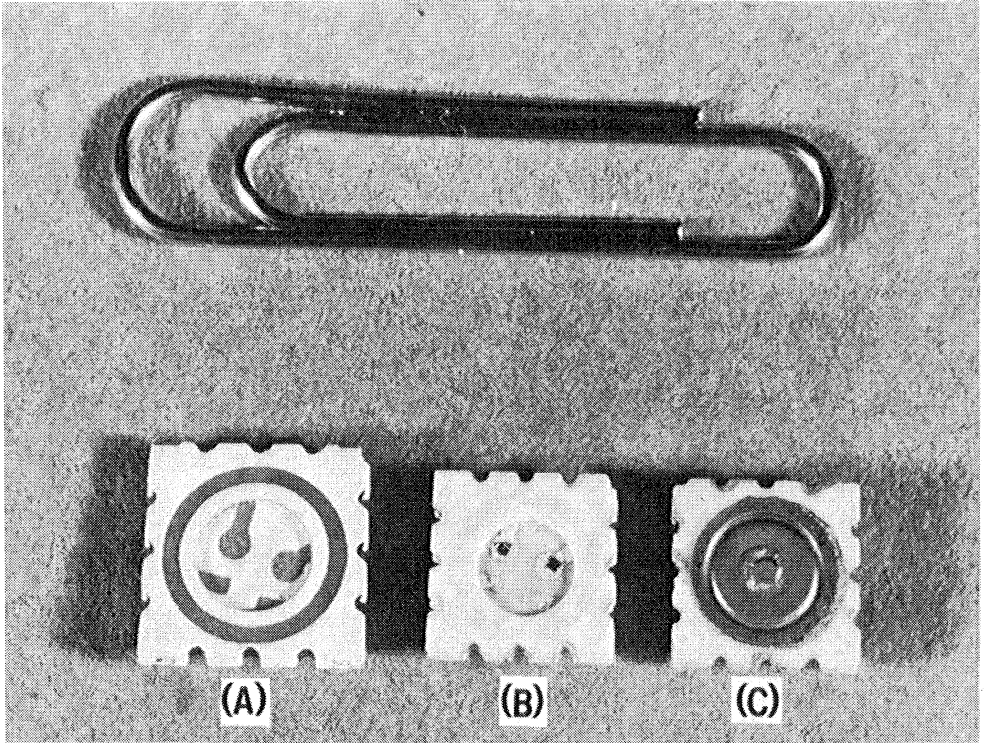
Transistor package: (A) Laminated structure, (B) sintered substrate and (C) sealed package.
